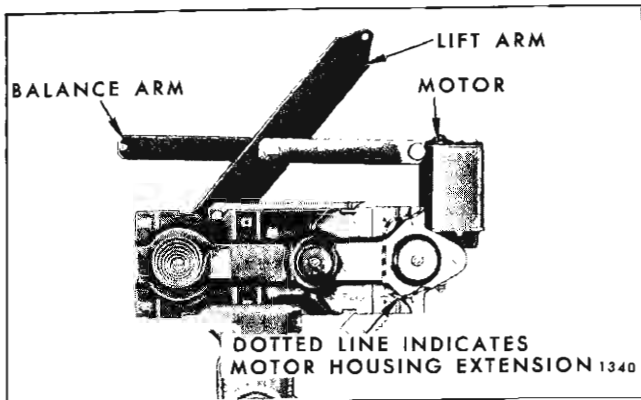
D77—Door Window Regulator and Electric Motor Assembly
